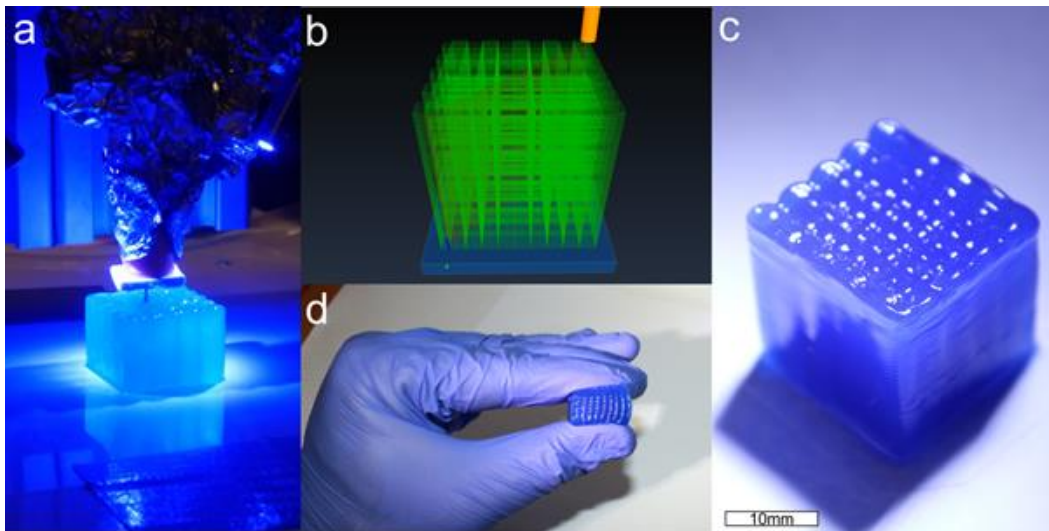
, a) The cube during printing, showing the illumination pattern and the ink deposition process. b) The toolpath used to print the cube c) The printed cube d) A demonstration of the cube's elasticity.
